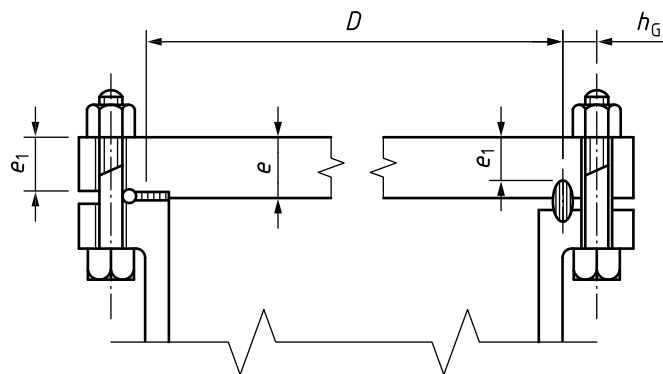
Typical non-welded flat ends and covers
